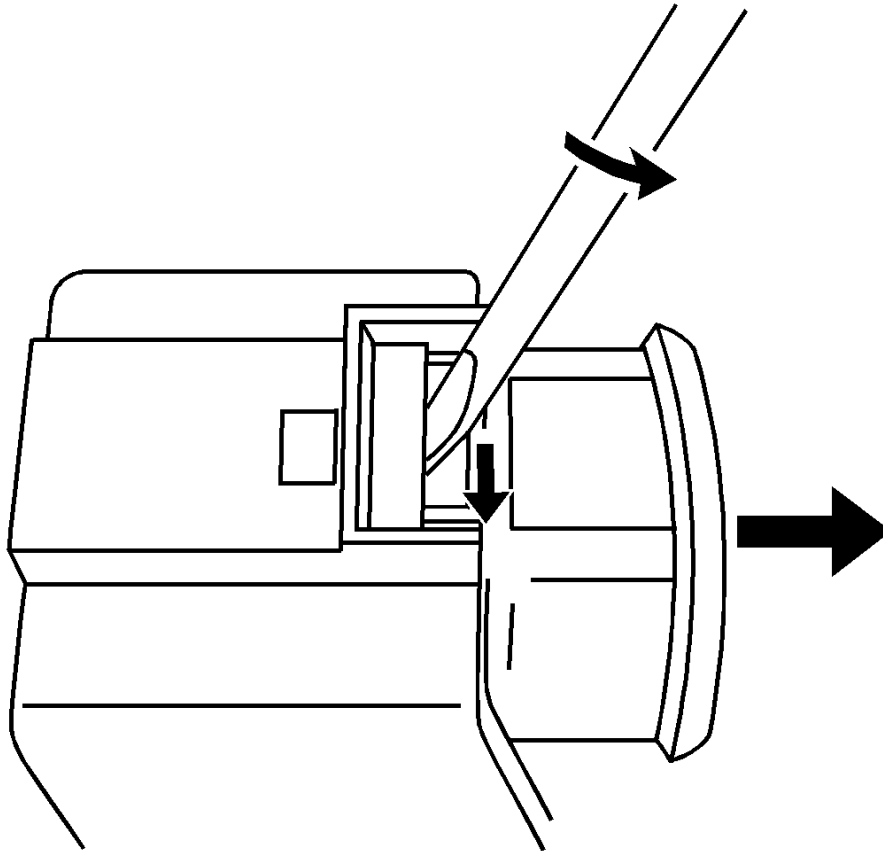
Twisting Flat-Bladed Tool To Push Top Of Locking Tab Inward
